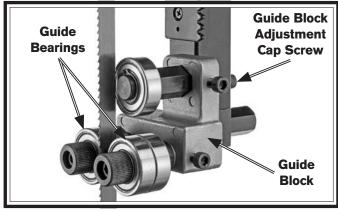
Upper guide bearing components (guide post cover removed for clarity).
